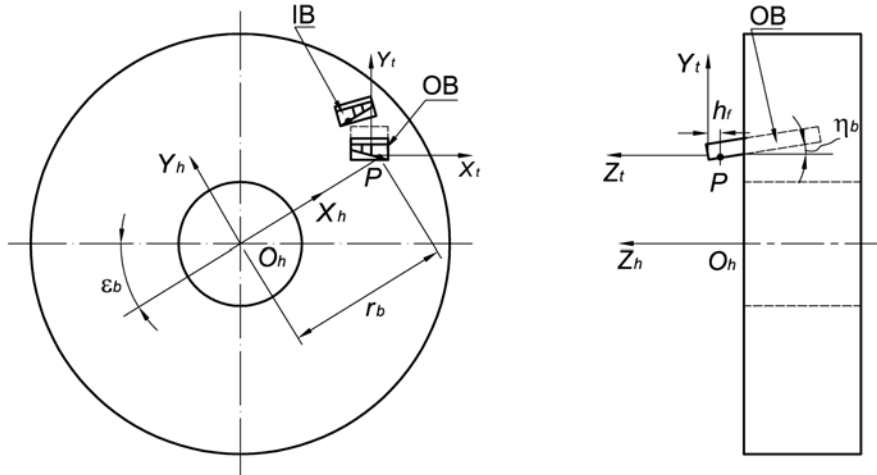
Sketch of a blade group mounted in the FH head cutter.
